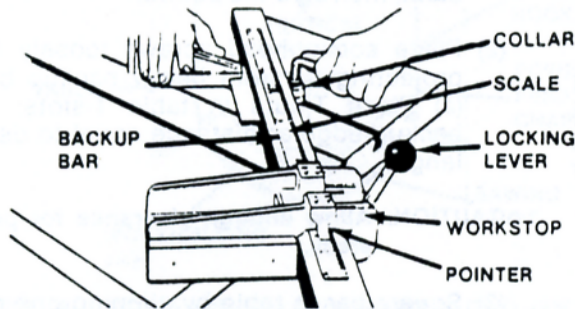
UNIVERSAL CALIBRATED WORK FIXTURE SET UP FOR ANGLE CUT-OFF.
